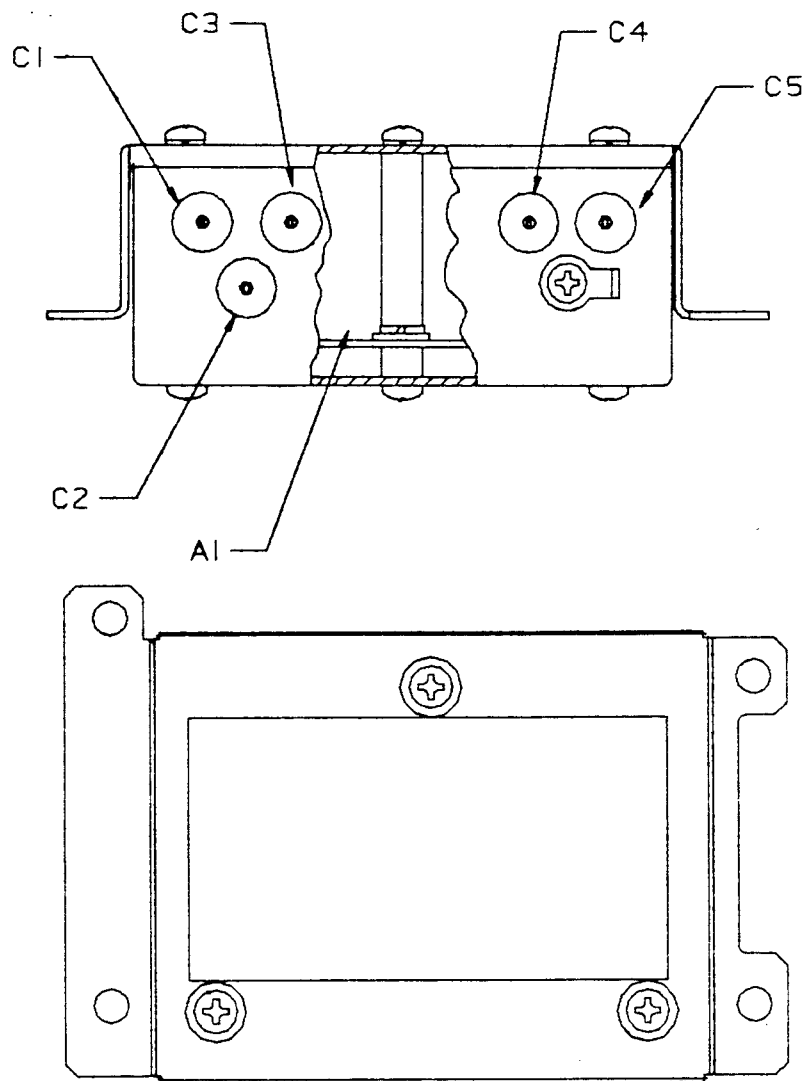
Front Panel Display Converter Assembly A13A6 Component Location Diagram (10073-2250)
